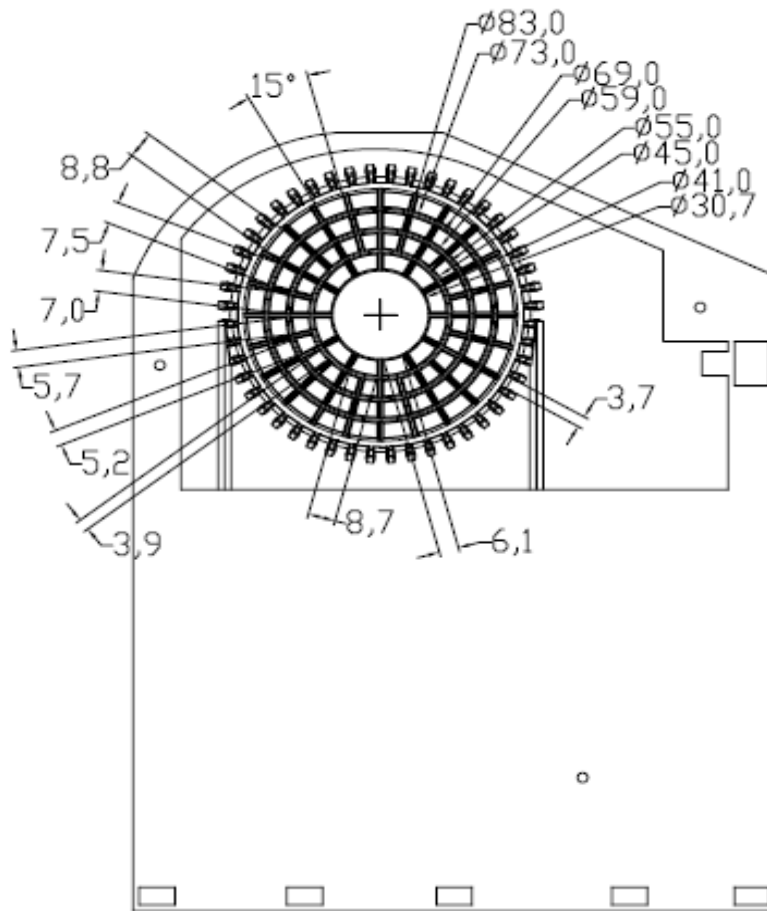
Drawing of Base Housing for model C74E-BBCC02
